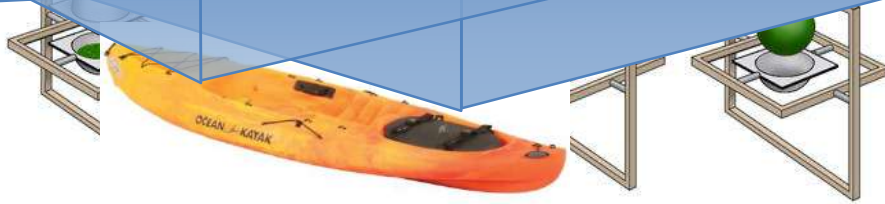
Rotational moulding is used to produce hollow shell-like plastic products
